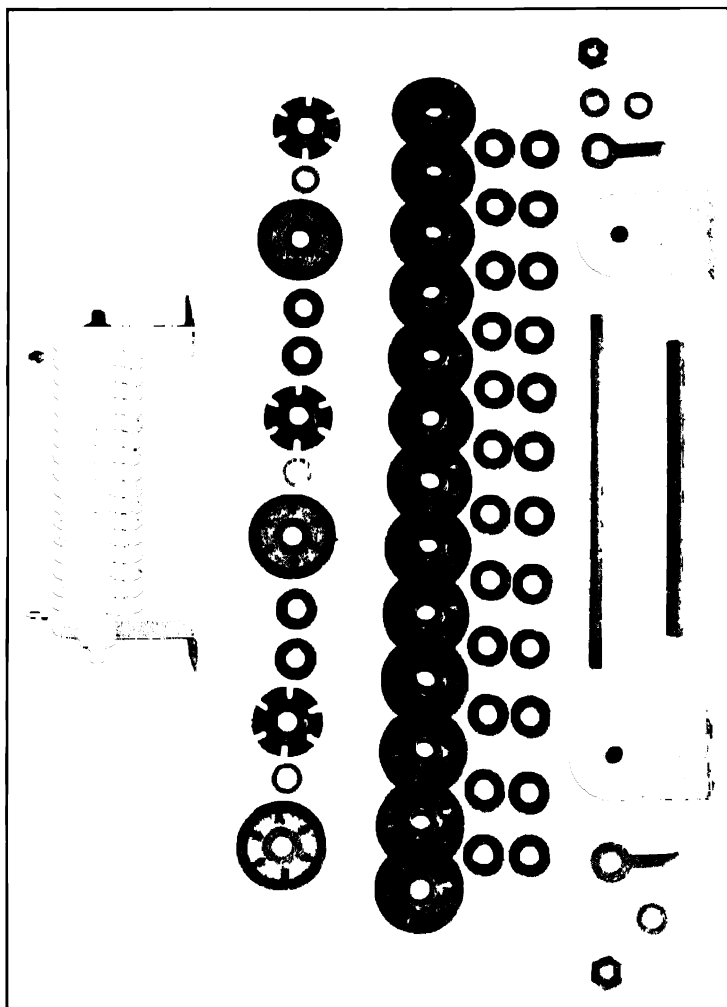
Selenium rectifier employing spring spacers showing component parts
